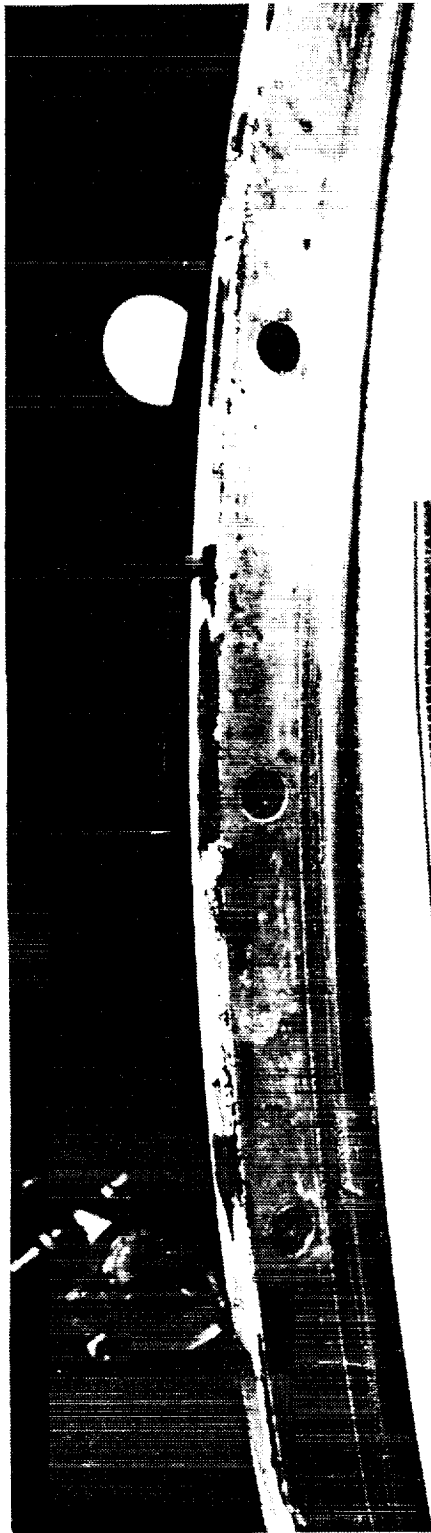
STS-28A Bearing Forward End Ring (120 deg)
